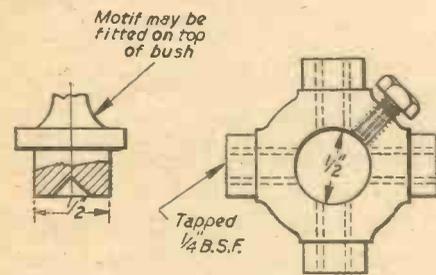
Detail of conical bearing piece. Fig. 5.—Plan of cross piece.
